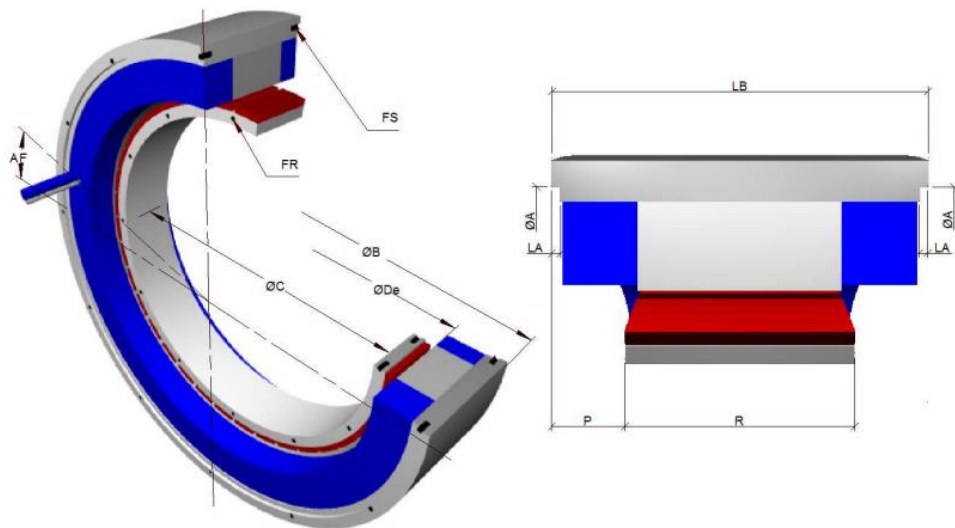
Representative scheme of the generator's dimensions. From [38]
